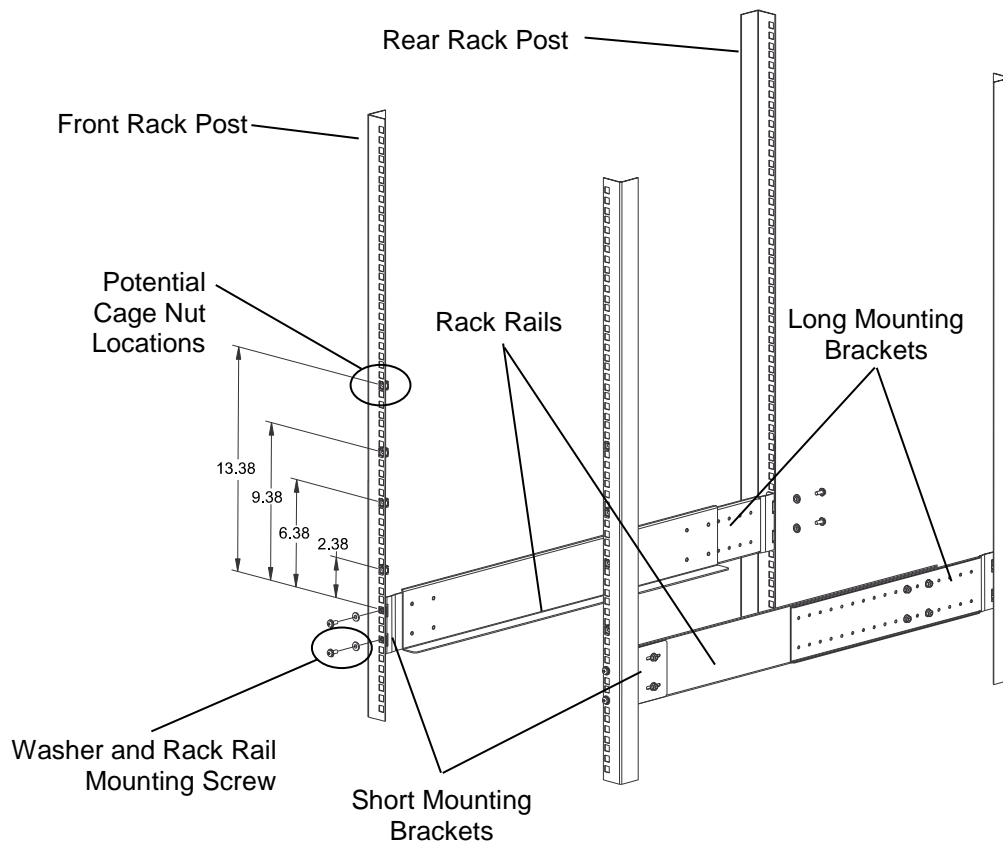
Rack Rail Assembly between the Front and Rear Rack Posts
